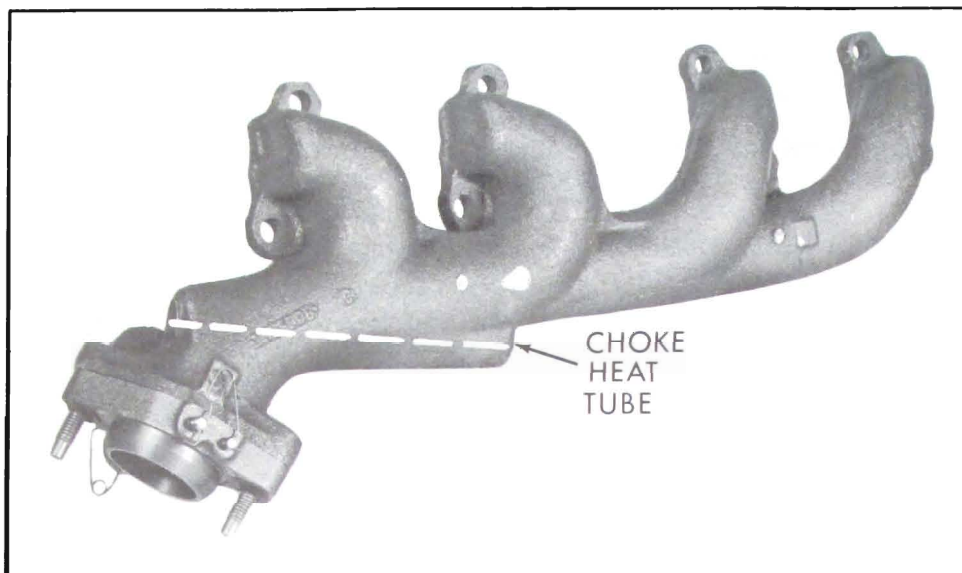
Right Exhaust Manifold and Valve Assembly - 300 Engine
